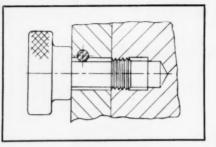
This sketch shows another way of retaining the screw whereby the screw and knob are made integrally and a pin is provided in such a position that the threads on the screw leave the tapped hole before they contact the pin.
